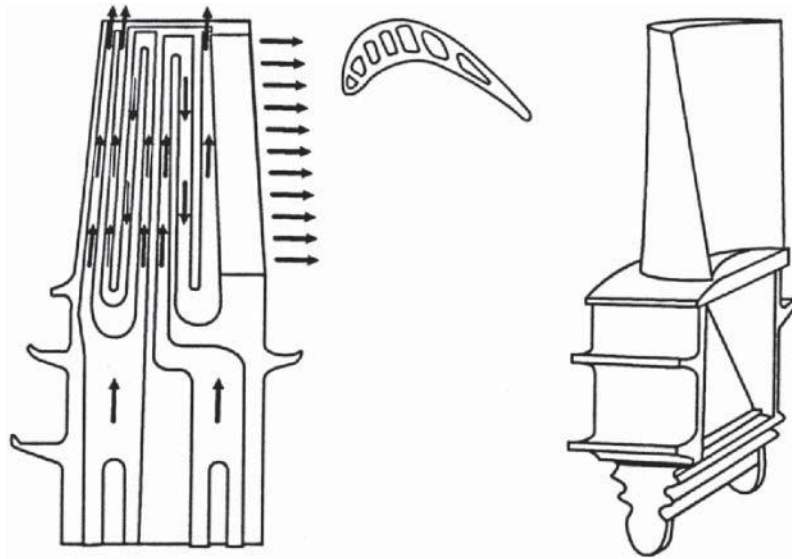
Gas turbine first-stage air-cooled bucket. Cutaway view exposes serpentine cooling passages. Courtesy of General Electric Company.
